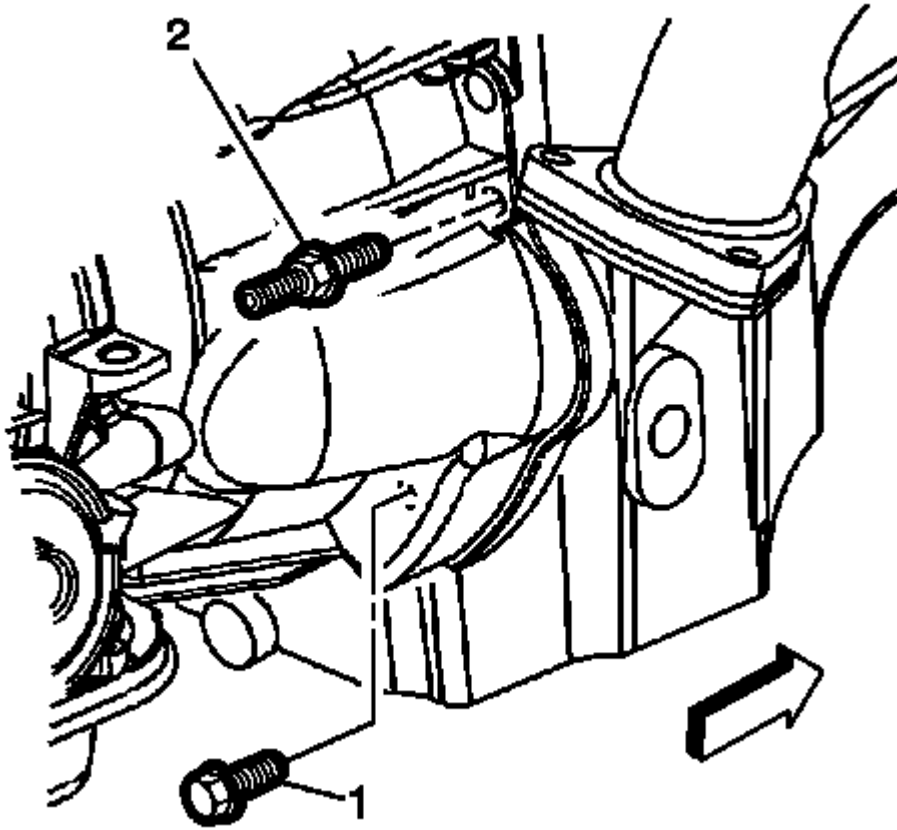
Flywheel-To-Torque Converter Bolts
